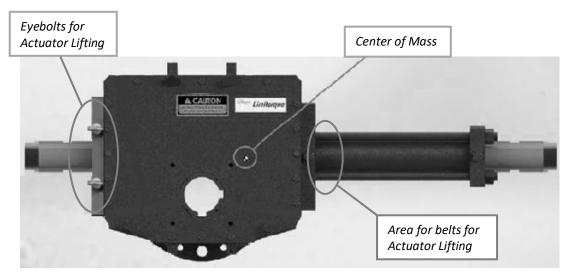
Double Acting Actuator Center of Gravity Position and Lifting Arrangement of LHS/LHH-25, and smaller
